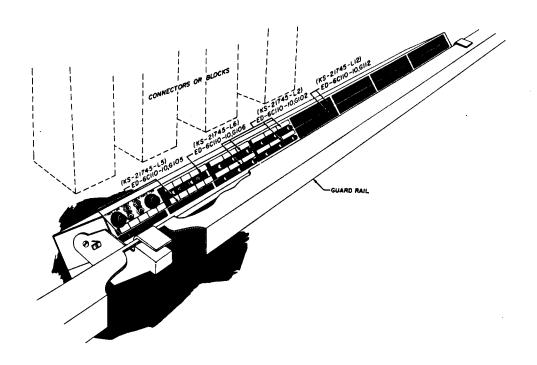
ED-6C110-10, G65 Test/Talk Panel For Existing Conventional Distributing Frames (Guardrail Mounting)
